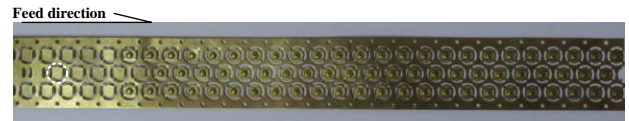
Progressive strip layout and developed connector shell by embossing and burring process
